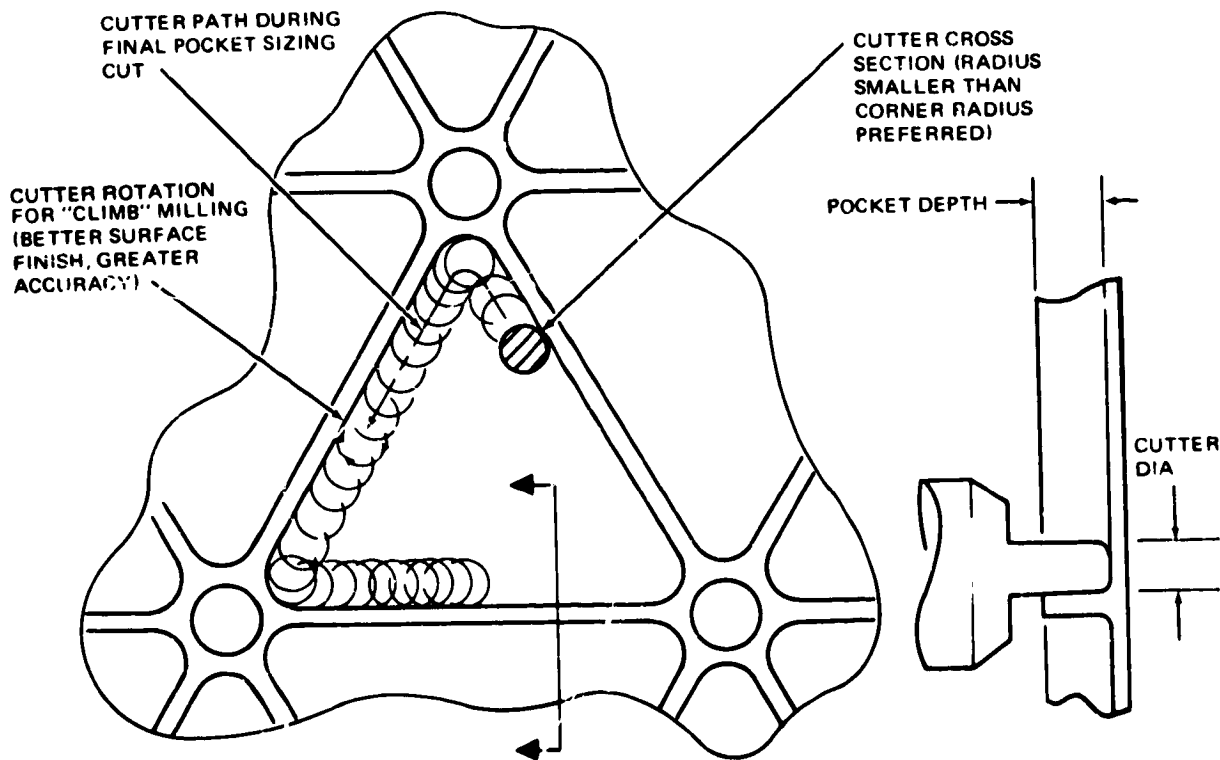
Machining Isogrid With Unflanged Ribs
